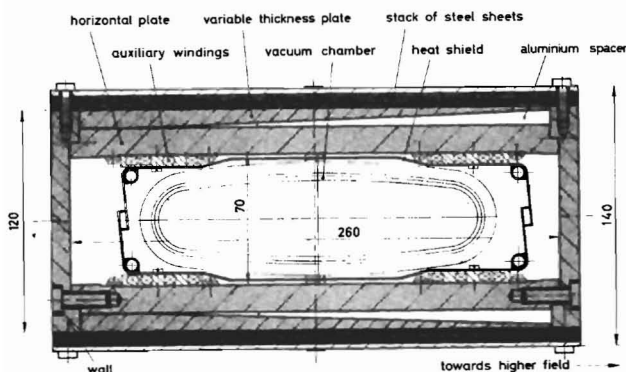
Cross-section of the fixed part of a magnetic beam channel.
